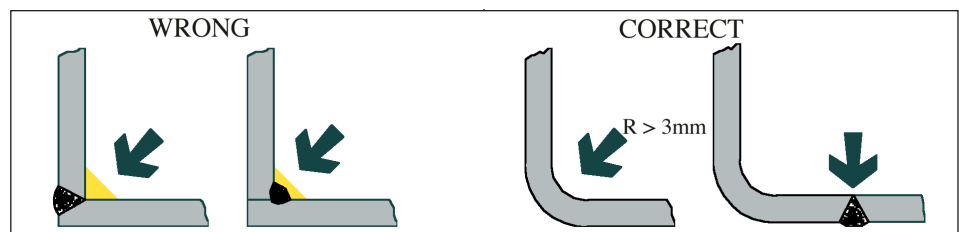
Internal angles and corners should be radiused and welds should not be made in corners.
